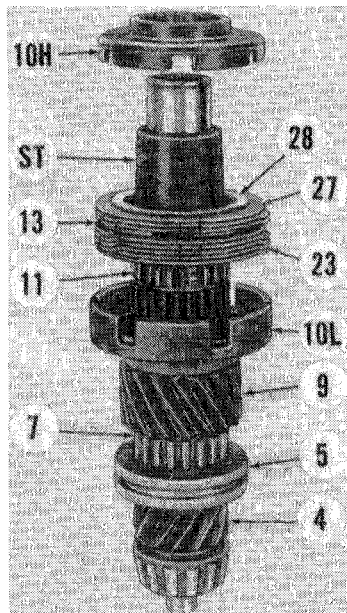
Use JDT-4A special tool (ST) to hold detent balls and springs in place when installing blocker assembly on all models except 4650.
